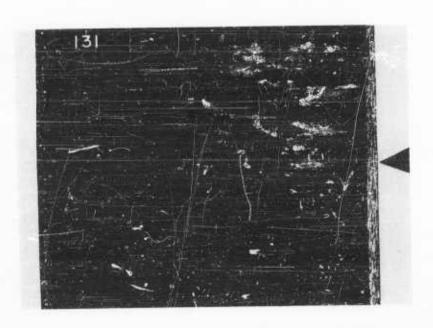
FAILURE IN SPECIMEN NO. 131
